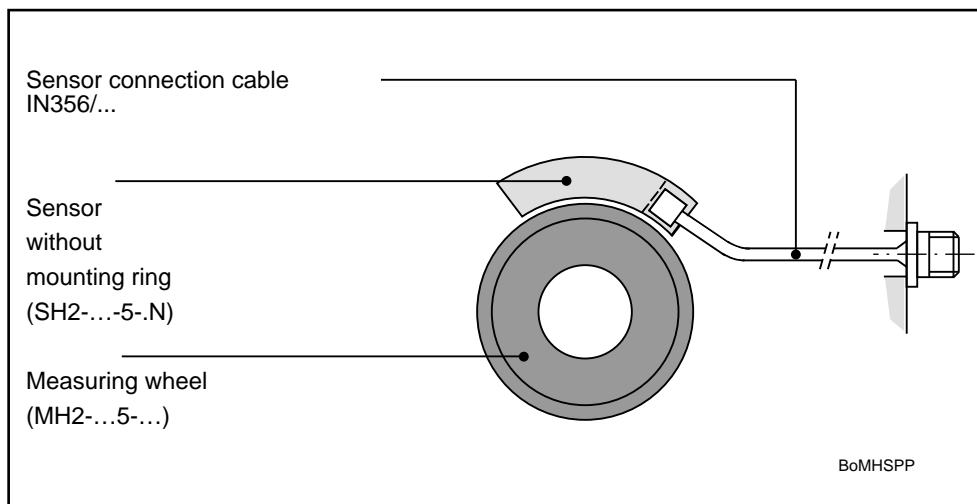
Components of a high-resolution main spindle position encoder (without mounting ring)
